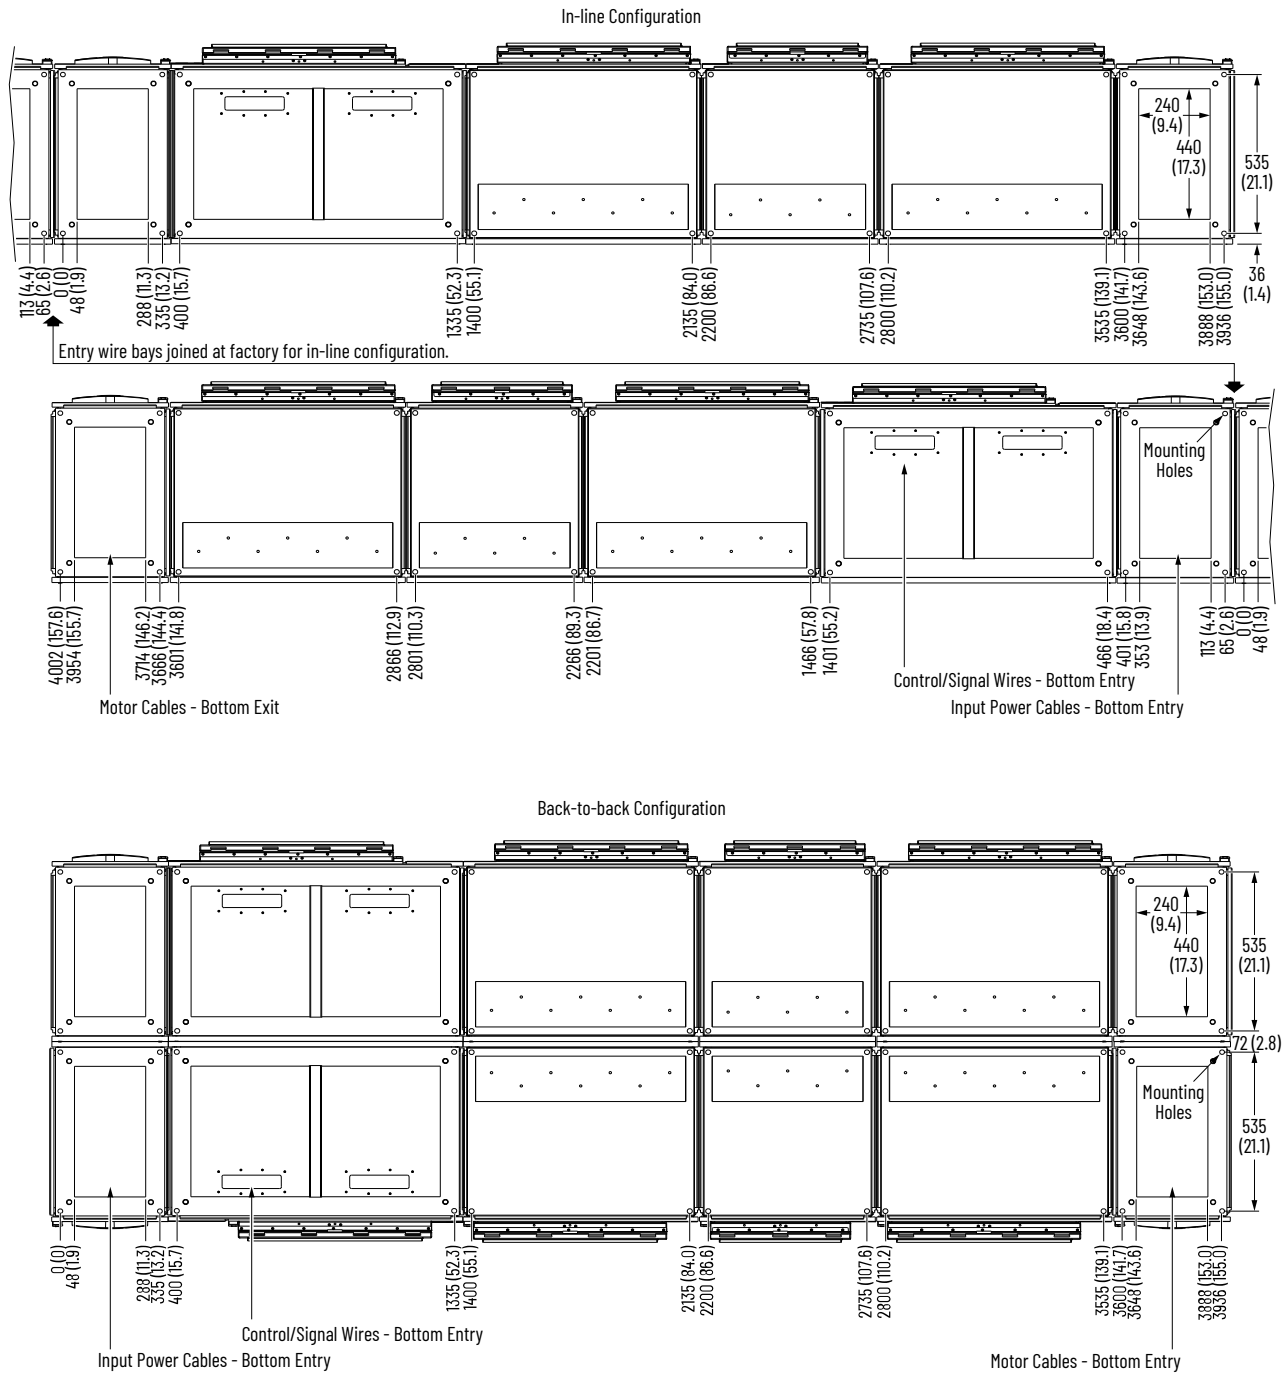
Frame 14 Drives—Bottom Views—Dimensions are in mm (in.)
